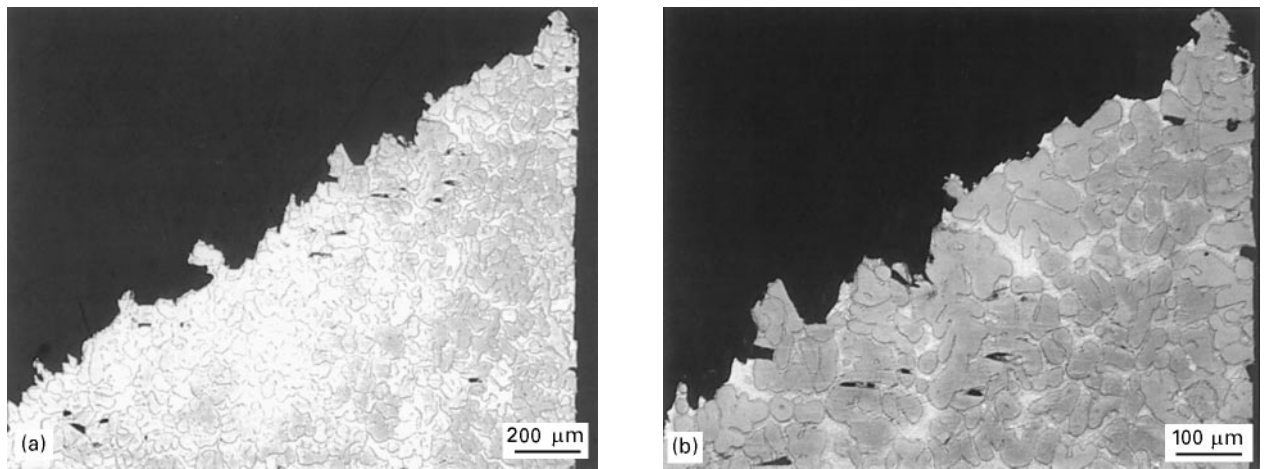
(a, b) Longitudinal sections through the fracture surface for a 371 °C (700 °F) tensile specimen of the cast material.
